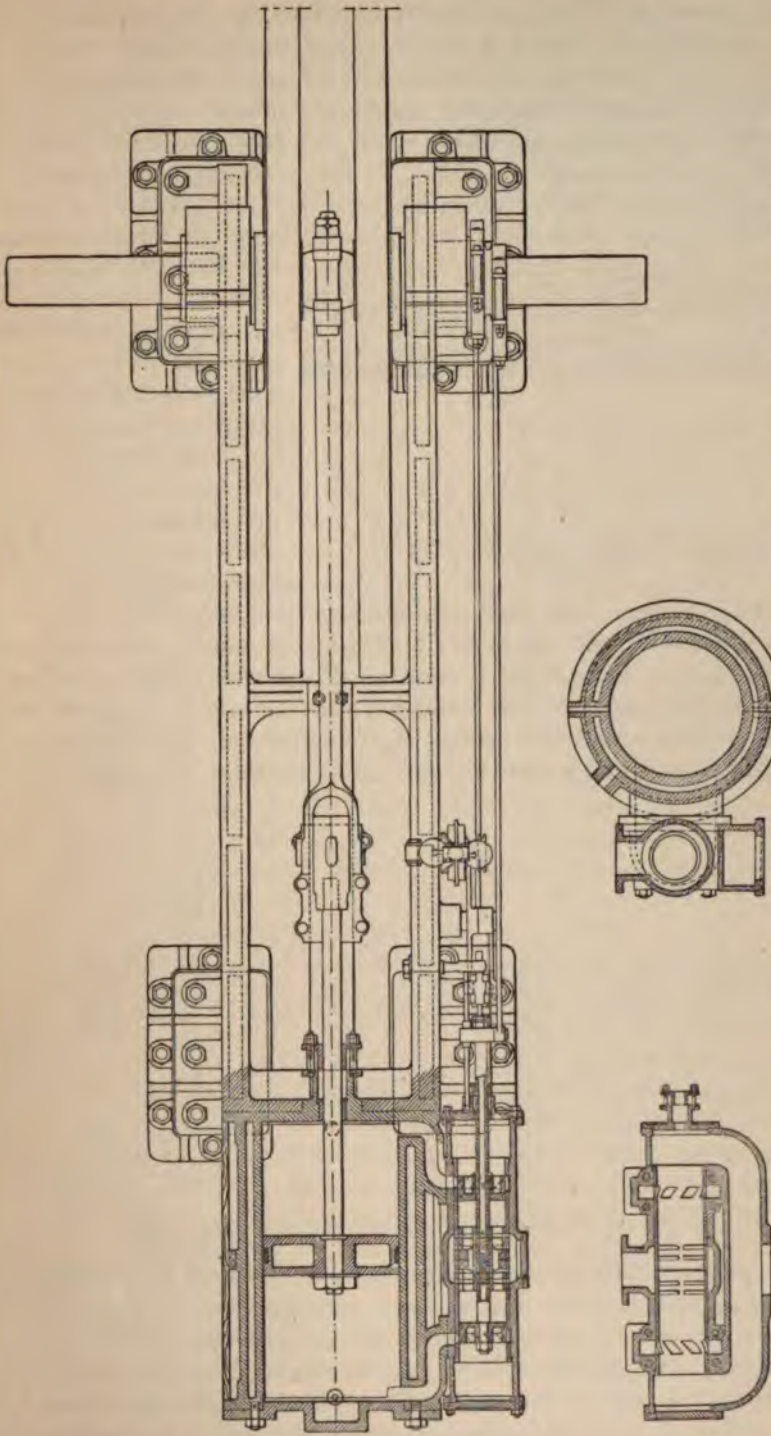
The General Engine and Boiler Company: Horizontal "Express" Steam Engine. Elevation. Scale 1/20th.
